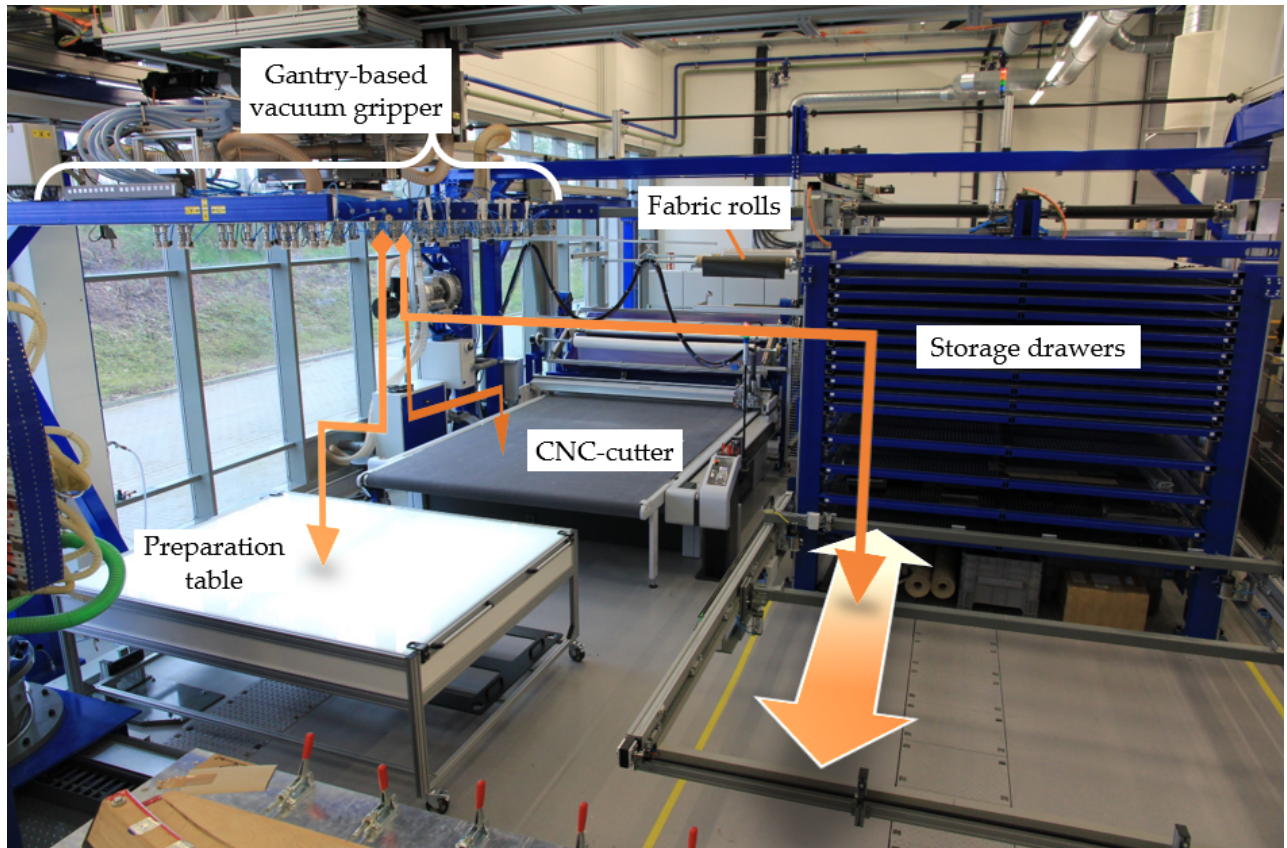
Overhead view of the EVO chain's fabric handling stages and tools [14].
